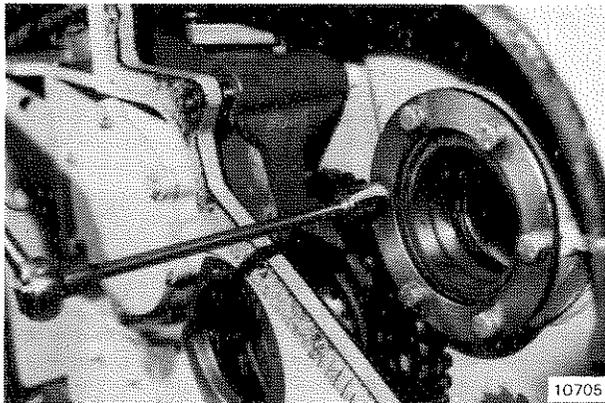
INSTALLING THE INTERMEDIATE GEAR AND THE FREESPOOL SHIFTING FORK (Page 2 of 4)
